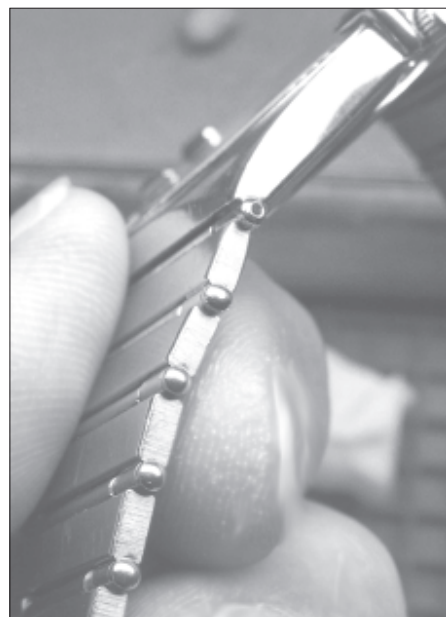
Both case lug tube caps were drilled. One side of the bracelet had solid end caps.
